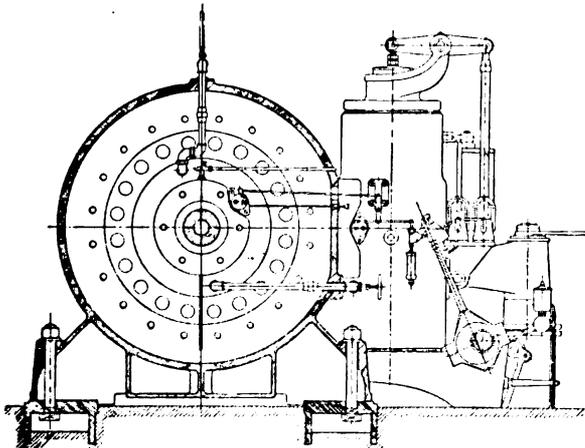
Koerting four-cycle Engine with side Valve Boxes.
